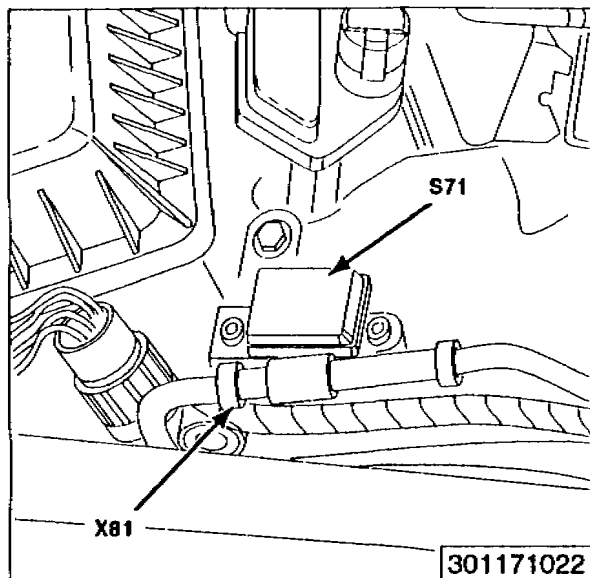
Front LH side of engine compartment (headlights removed)
